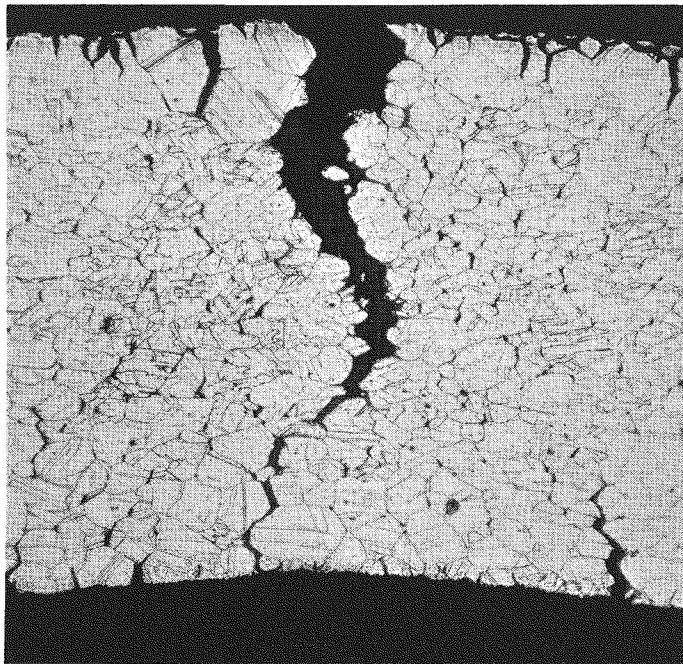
METALLOGRAPHIC VIEW OF CRACK IN PRESSURE-TESTED IRHS CAPSULE--WELD ZONE CRACK
